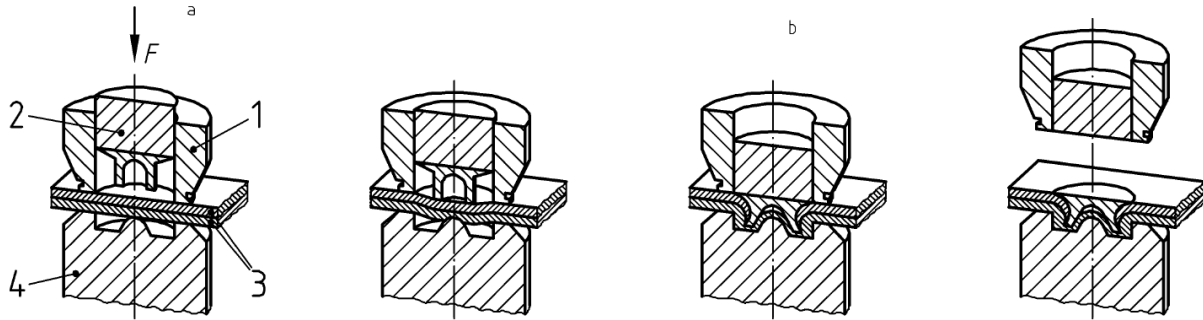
Joining process of a self-piercing rivet connection, schematic representation (1 – blank holder, 2 – punch, 3 – assembly parts, 4 – female die) [2]
